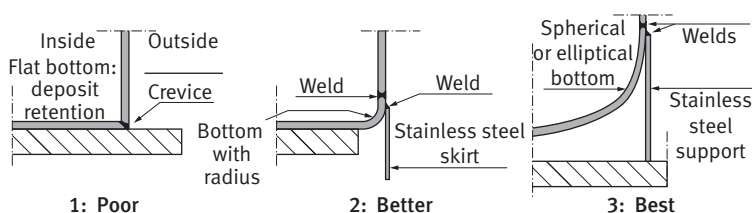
Welded vessel bottom designs
